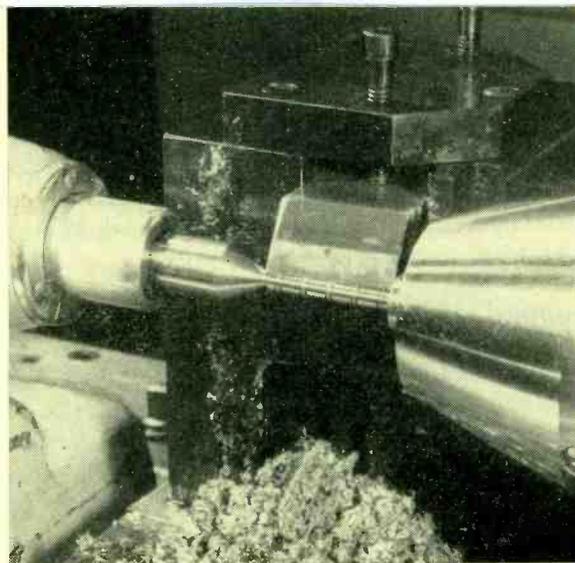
Ten special grooves are machined in tuning-pin support, using Stellite skiving tool and 10-in. power-feed lathe
